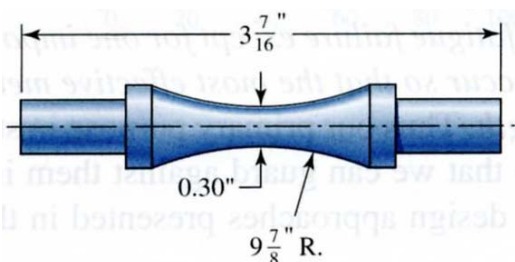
Test specimen geometry for the R.R. Moore rotating-beam machine [3].
